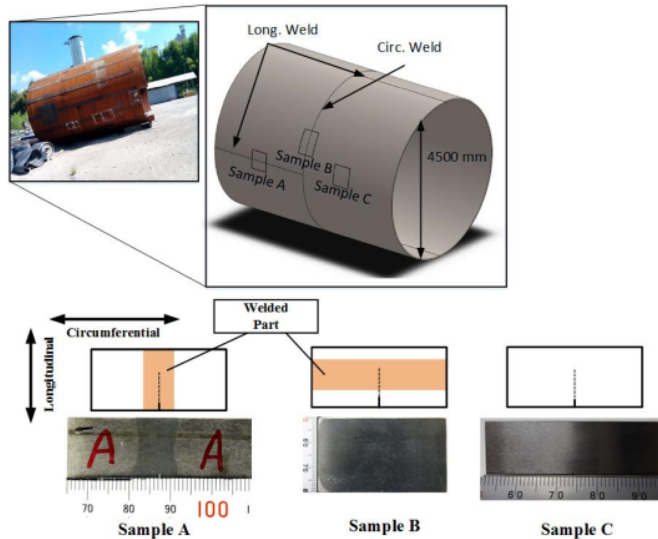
A photograph of a section of welded shell kiln for analysis with a different direction of welding joint (sample A: longitudinal welded direction; Sample B: circumferential welded direction; Sample C: non-welded part)
